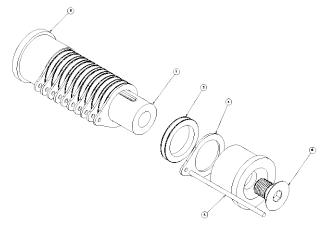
Pulley assembly: Pulley shaft (1) Shaft Nut (2) Pulley (3) Liner (4) Guide pin (5) Shaft bolt (6)
